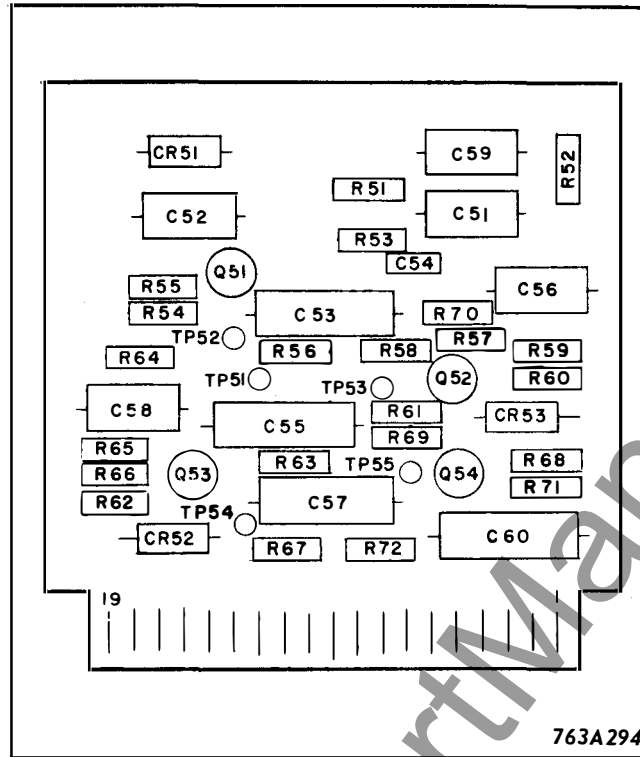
Component locations on amplifier and limiter printed circuit board.
